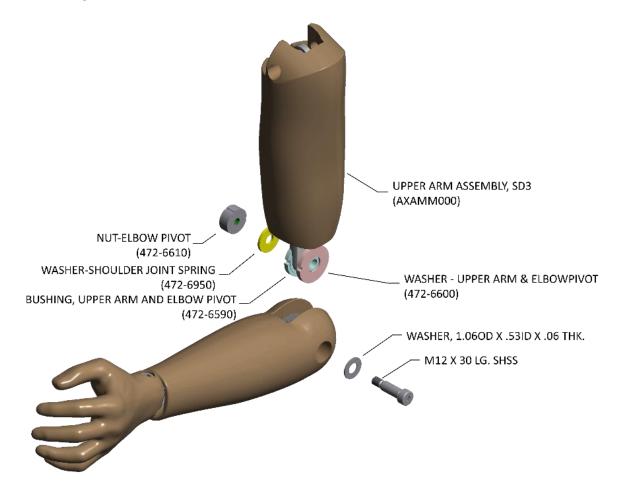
Exploded View of 472-6500-1 with AXAMM000
